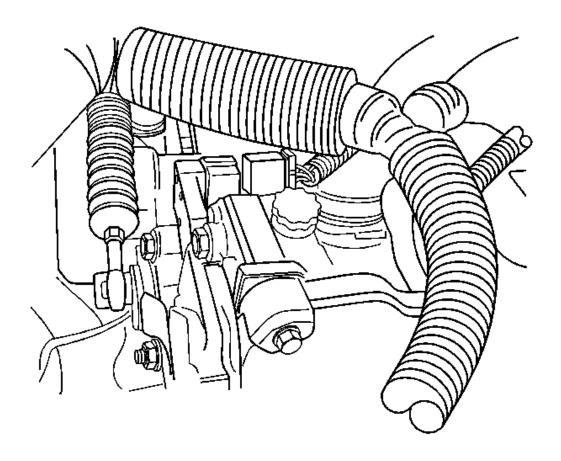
View Of Range Selector Cable & Cable Bracket Retainer Courtesy of GENERAL MOTORS CORP.
